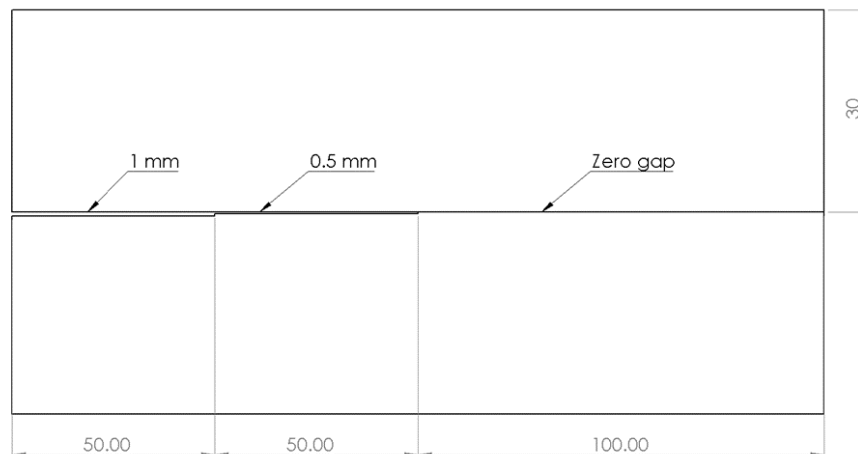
Stepwise opening gap sample design (t=10mm). The welding direction is from the beginning of the zero gap until the end of the 1 mm gap.
